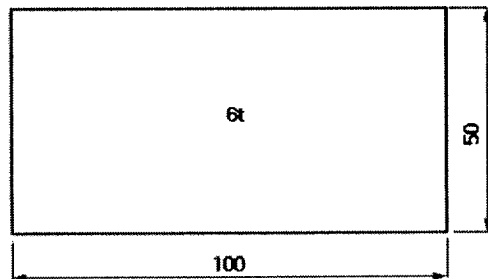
Specimen of plate for plasma keyhole welding
